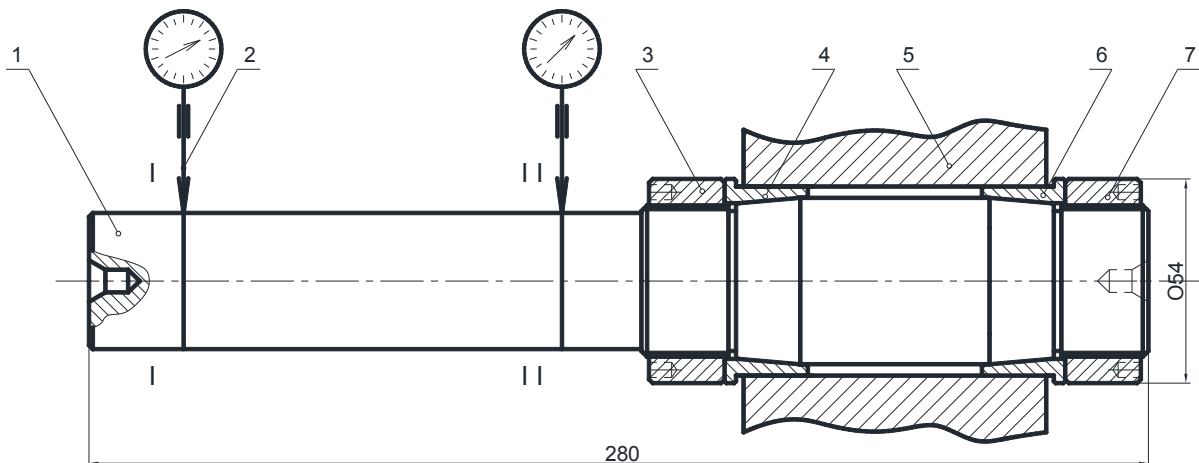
Equipment for controlling of the real position of the datum surfaces of cylindrical tool holders
